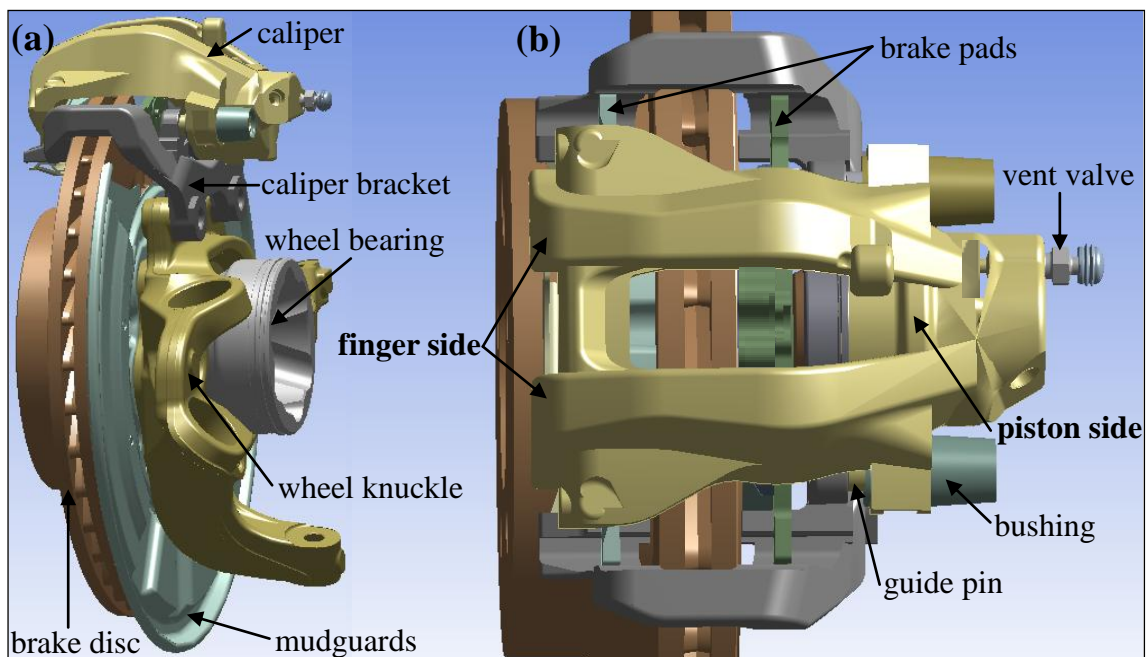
(a) The brake corner assembly and (b) the wheel brake system of a fist caliper brake
